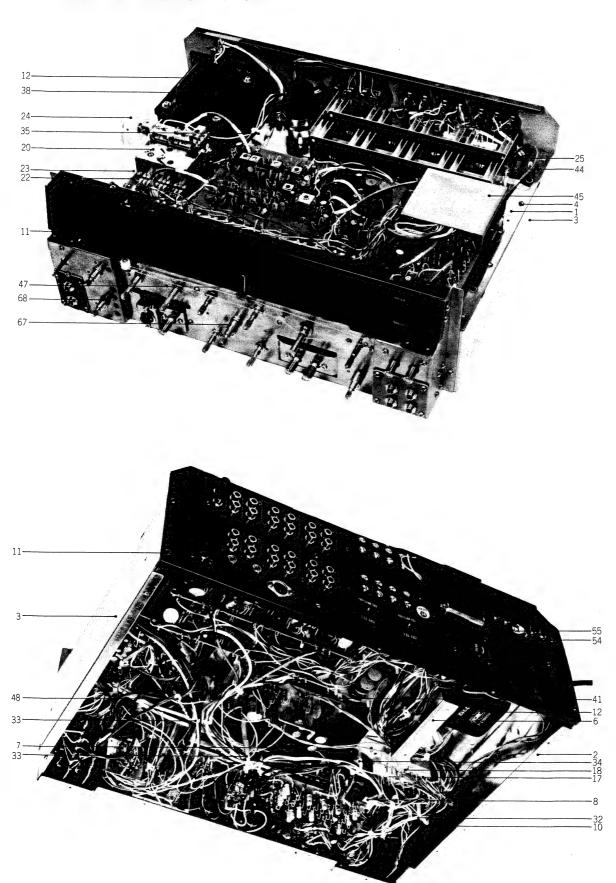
PHOTO OF FRONT CHASSIS/REAR PANEL BLOCK
